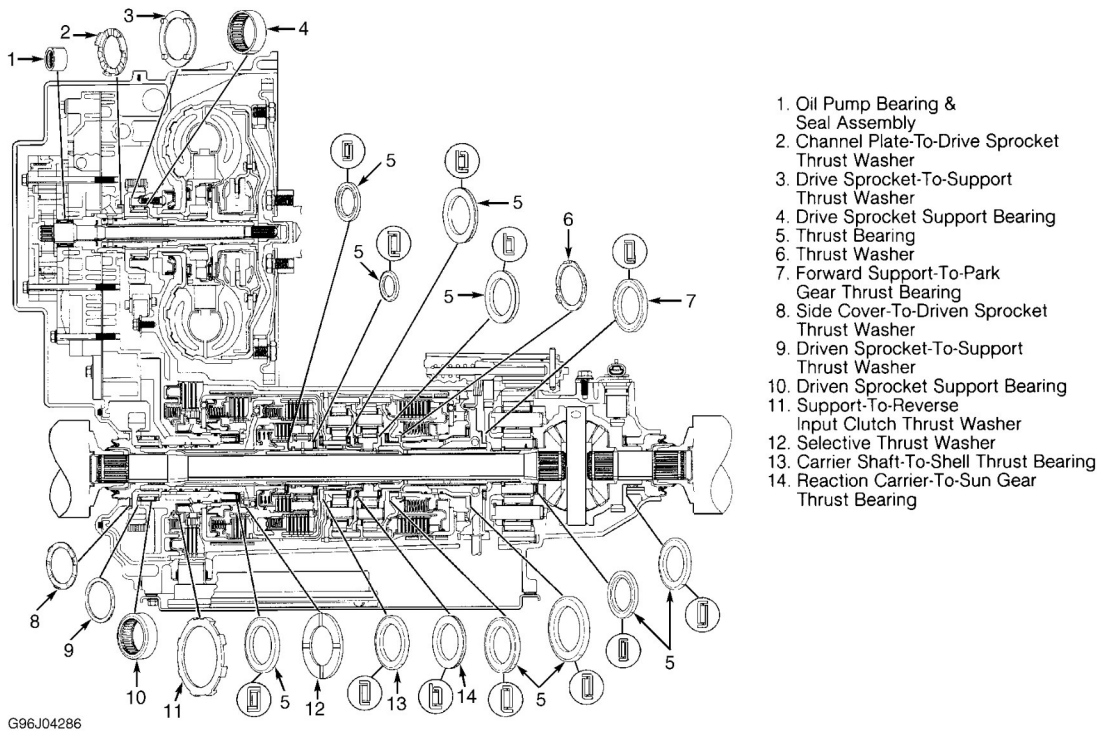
Identifying 4T40-E Thrust Bearing & Thrust Washer Locations
